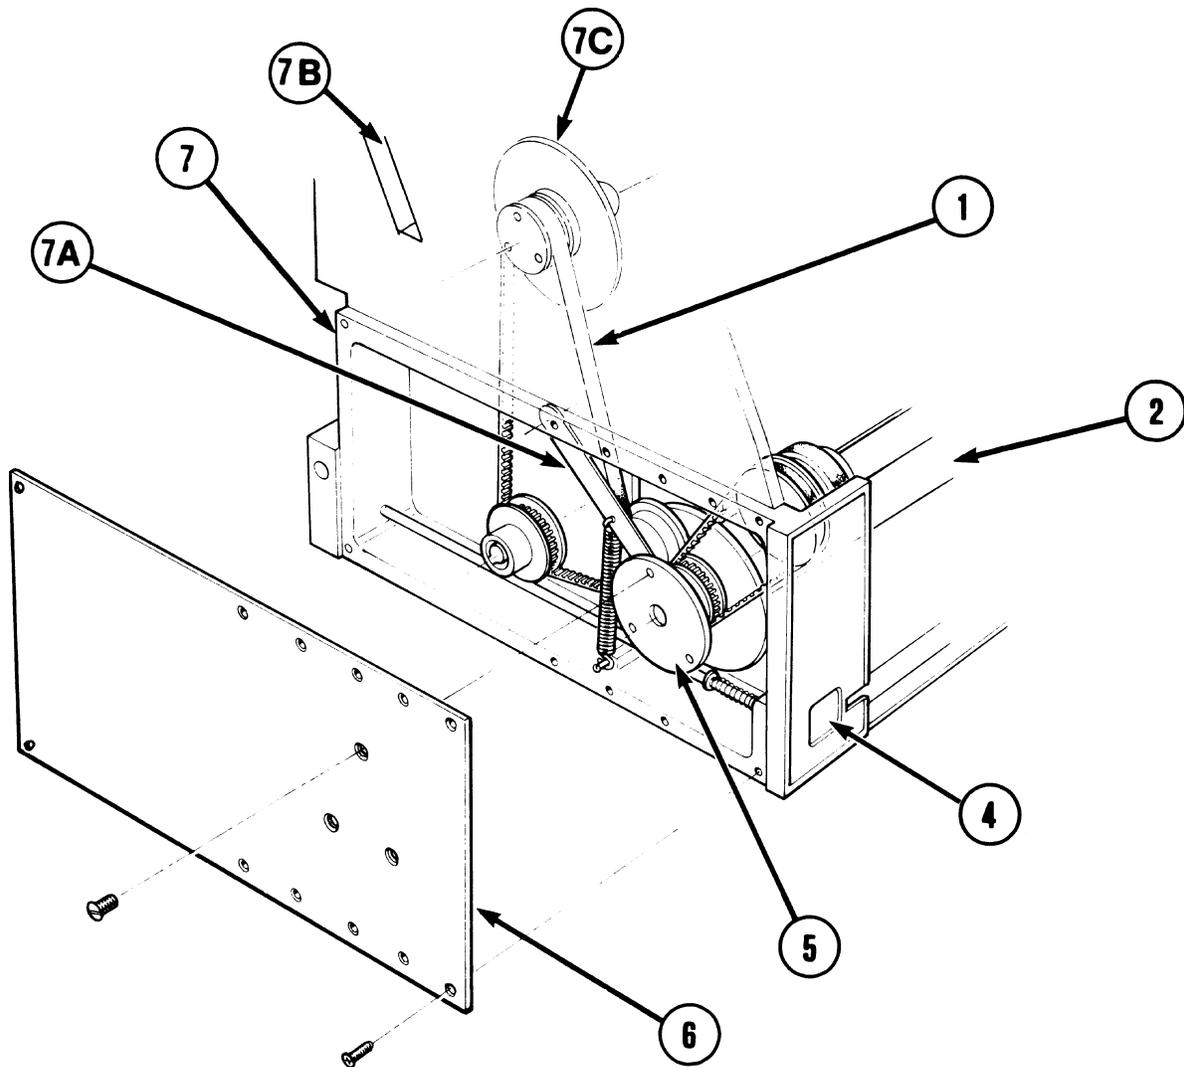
Exploded diagram: Chart drive system sheet 1 of 2
